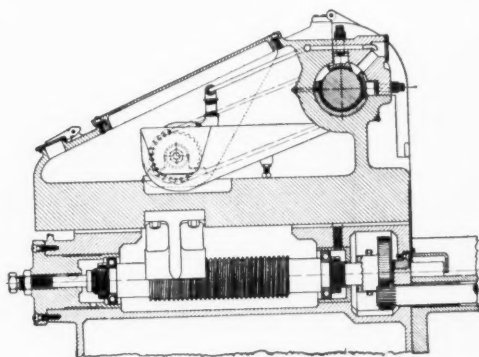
Cross section of the wheel slide of a grinding machine. Note details of chain driven oil pump, feed screw and spindle bearing. Oil piping to latter (at top of drawing) can also be traced.
